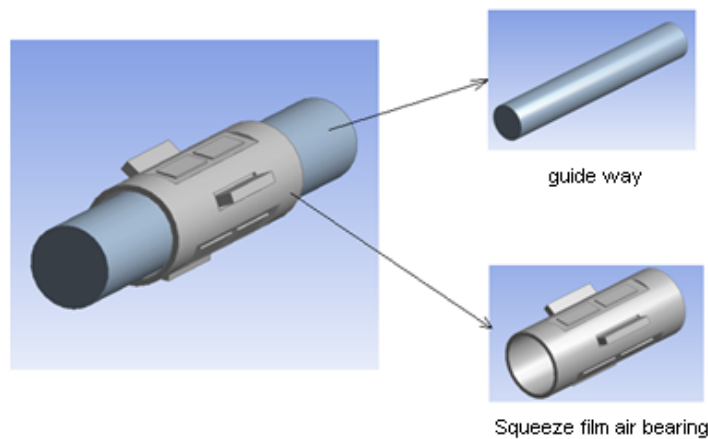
Squeeze film air journal bearing with six single-layer piezoelectric actuators mounted on three milled flat surfaces, shown with the guide way in the shape of a round bar.
